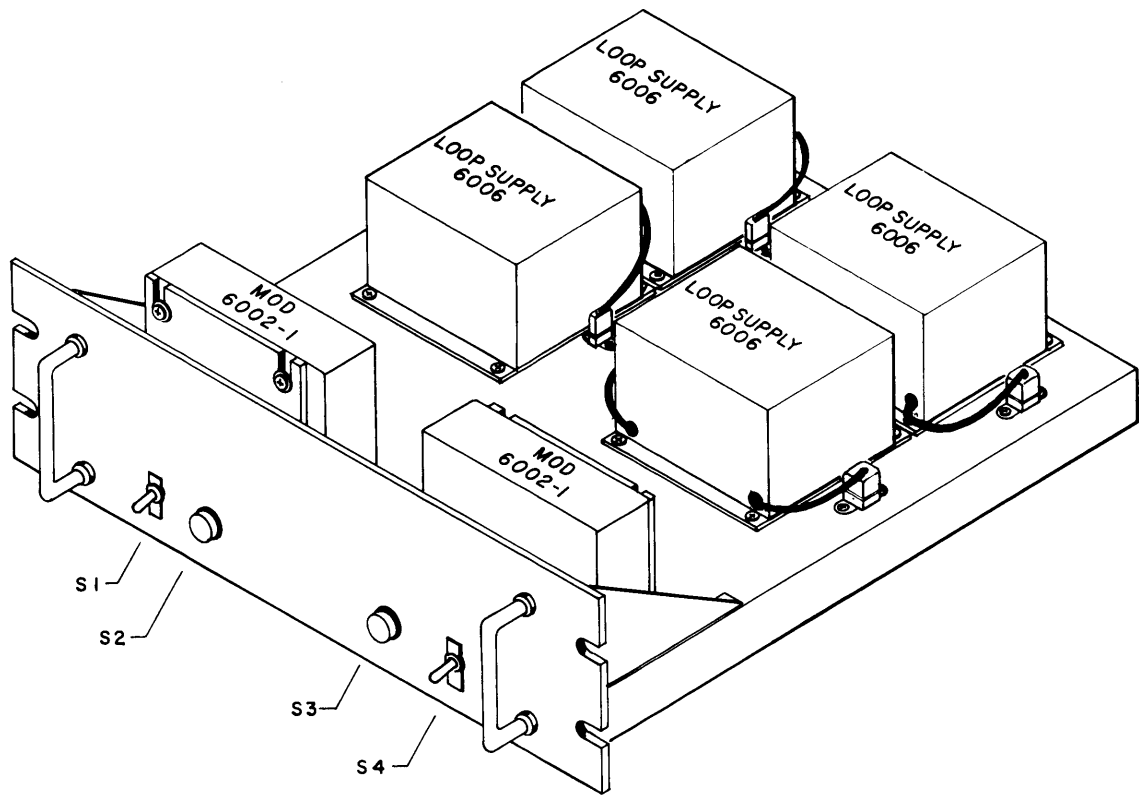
660A Tone Converter Drawer RF2.17, Isometric View
